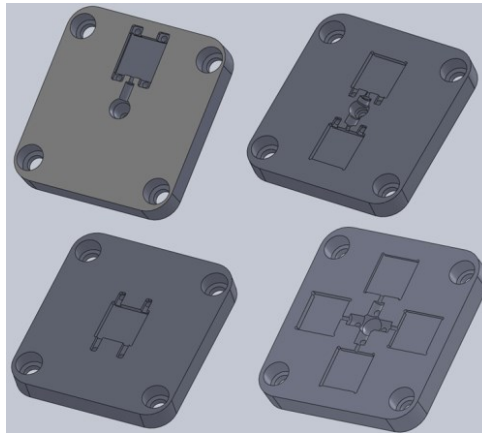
Insert designs used / modeled for use in micromolding assembly.
